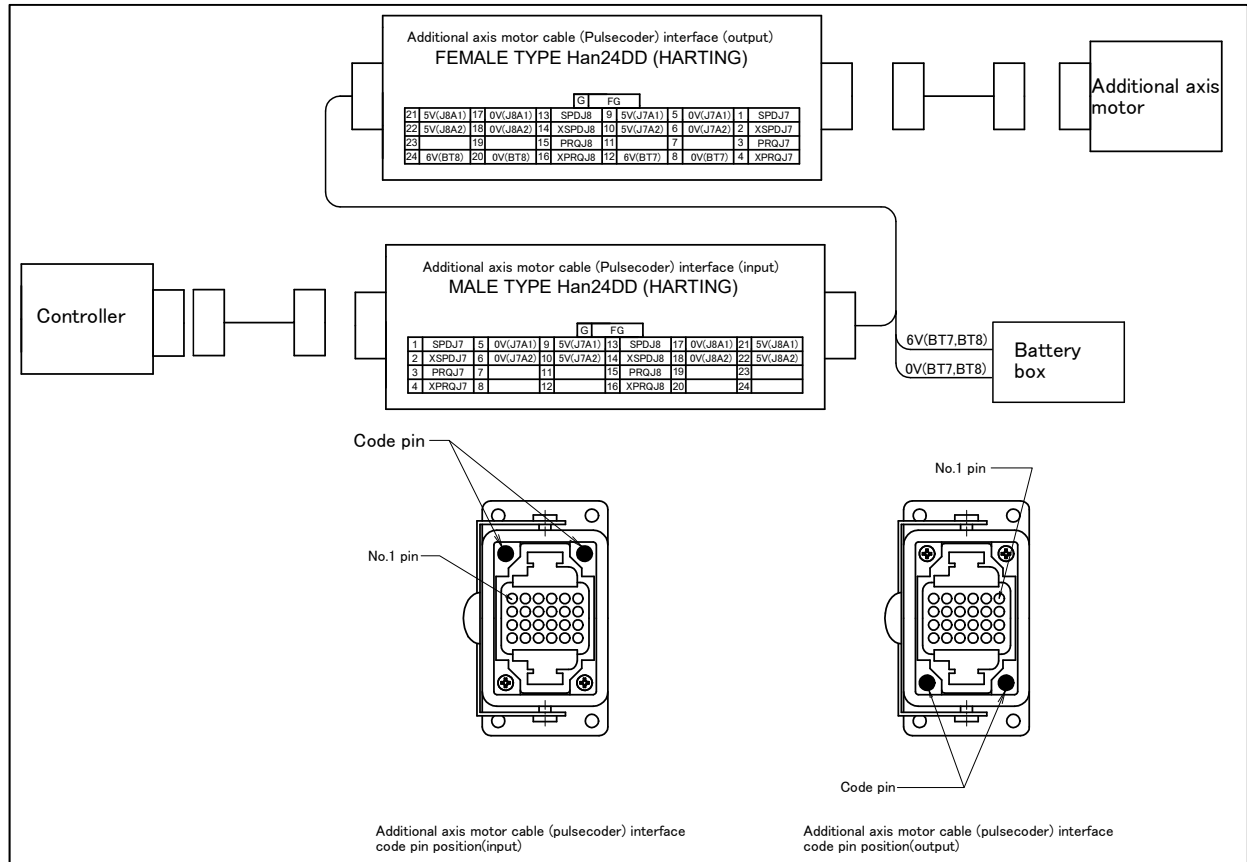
(r) Pin layout and code pin position of the additional axis motor cable (Pulsecoder cable) (ARP) interface and layout position of the code pin (option)
